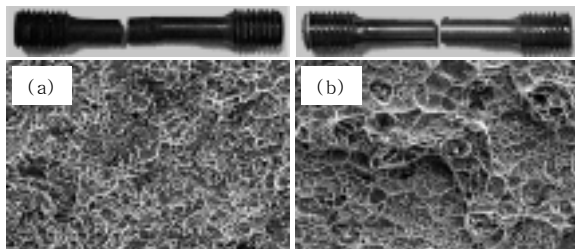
SEM fracture surface on (a) base metal, (b) the interlayer
